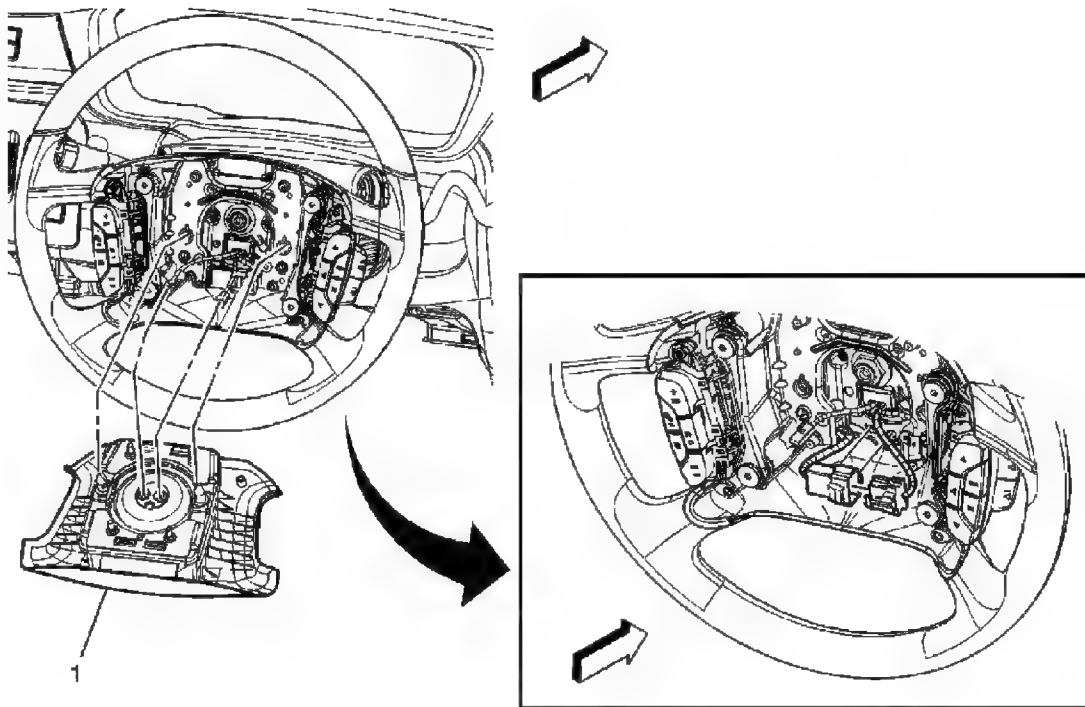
View Of Inflatable Restraint Steering Wheel Module
